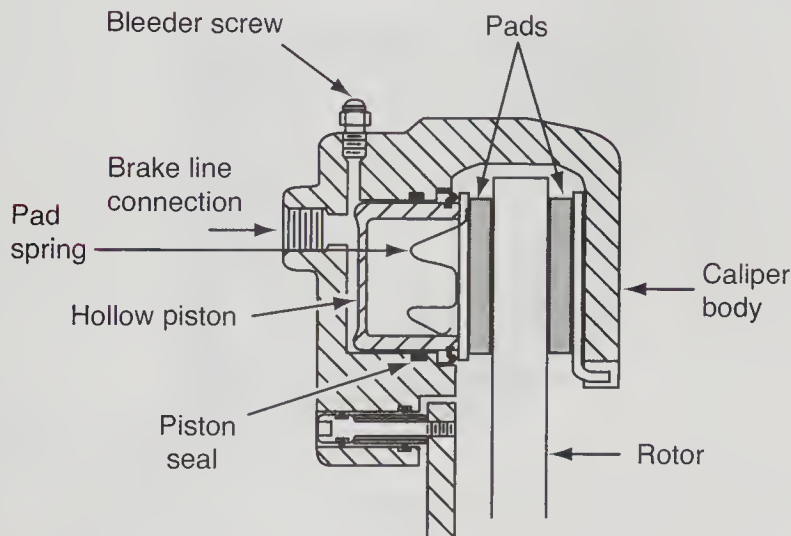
Cross section of a floating caliper. Sliding calipers are similar.
